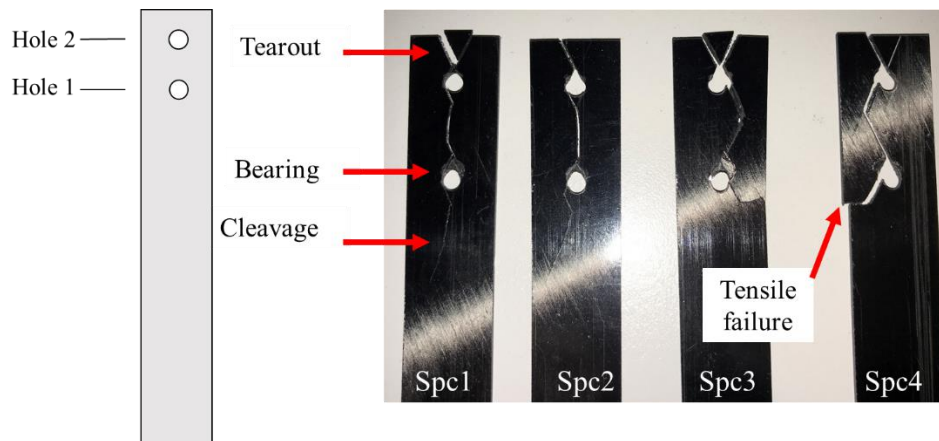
Photographs of the surface view of the damaged MR60-YSH70 specimens.
